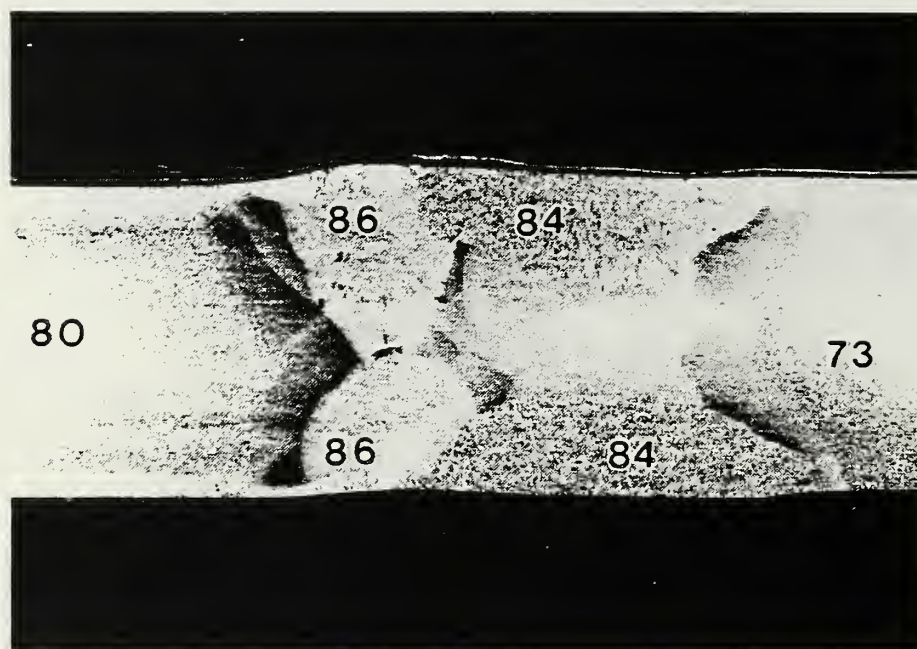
Defects in Vertical Weld Metal
